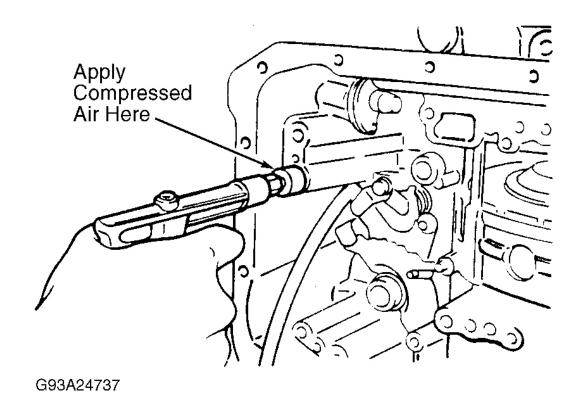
Checking 2-4 Brake Band Servo Courtesy of MAZDA MOTORS CORP.
